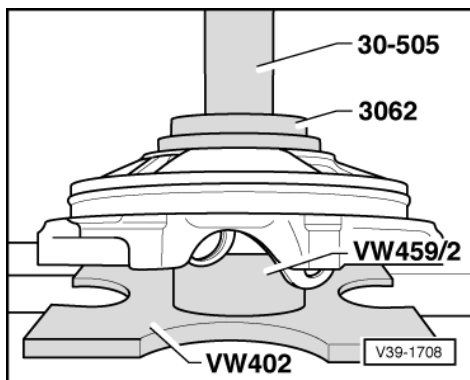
> Driving outer race for small taper roller bearing into gearbox housing
